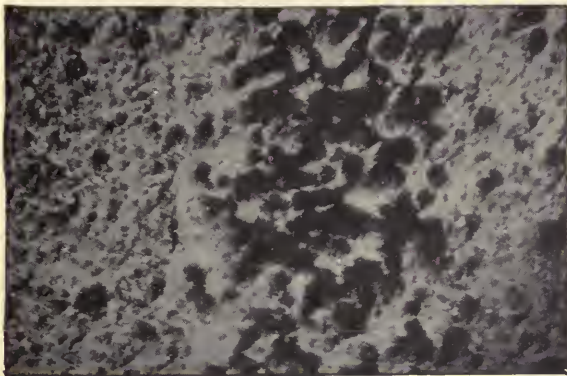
Microphotograph showing blowholes in an electric weld.
